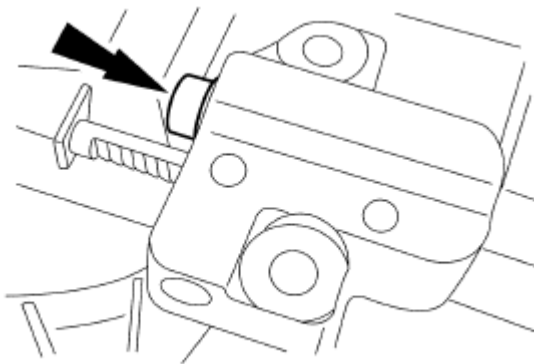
Locating Camshaft Drive Sprockets Bolts
